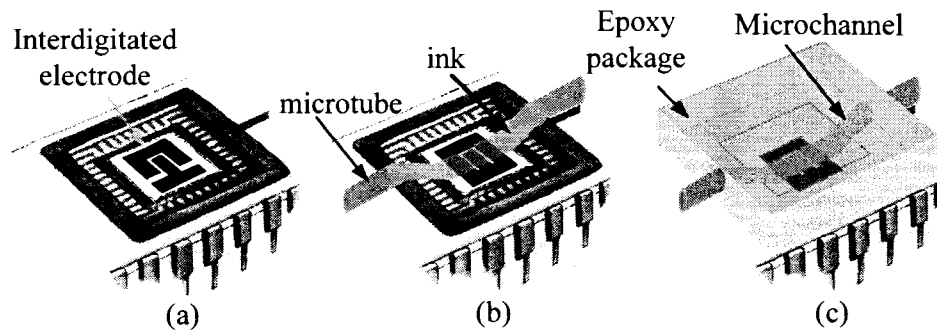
Illustration of an on-chip microfluidic packaging procedure using direct-write assembly technique: (a) before packaging, (b) after ink deposition, (c) after epoxy encapsulation and ink removal.
